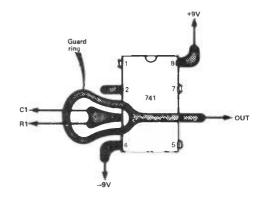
Guard ring etched on a PCB and viewed through the top of the board
